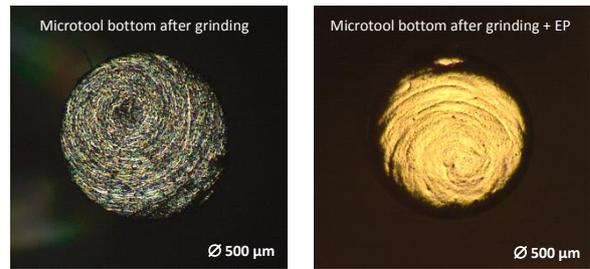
Microscope images of the grinded tool bottom surface before and after EP post-process.
